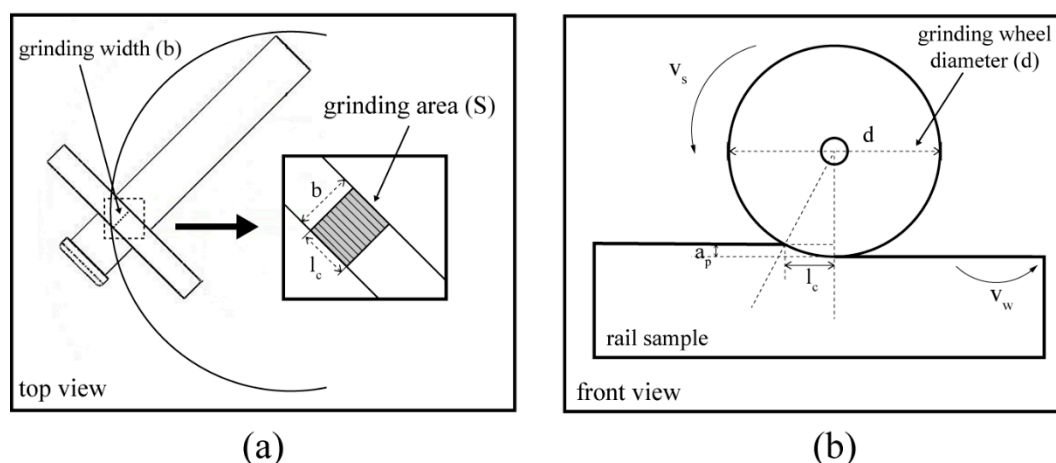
Grinding contact process between the grinding wheel and the workpiece, (a) top view, (b) front view.
